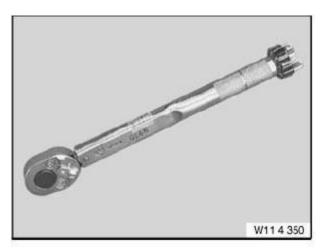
Identifying Set Special Tool 11 4 350 Courtesy of BMW OF NORTH AMERICA, INC.
